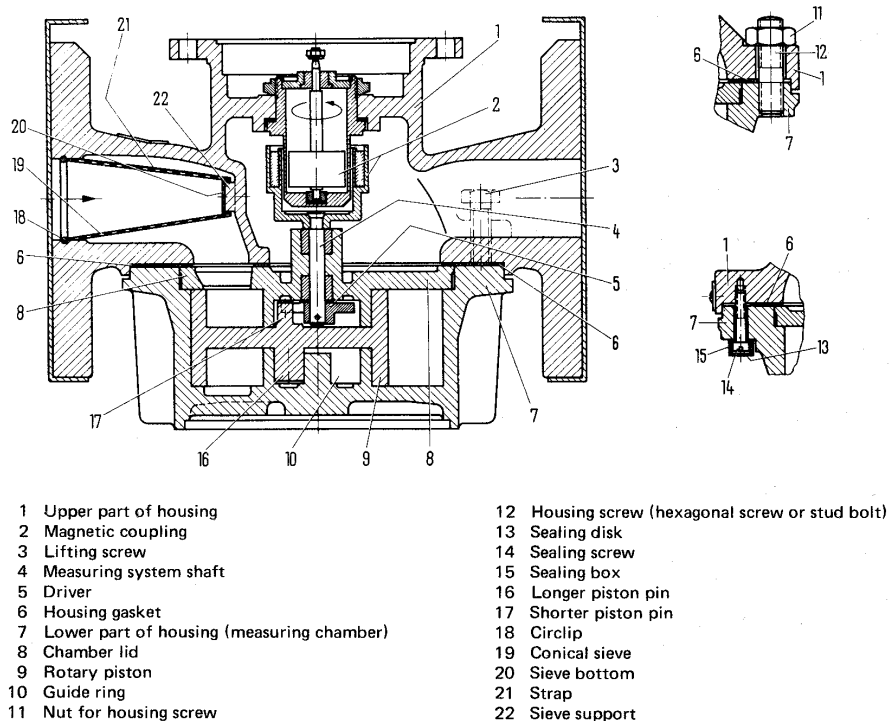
/1 Measuring system of rotary-piston meter DN 32, PN 10
